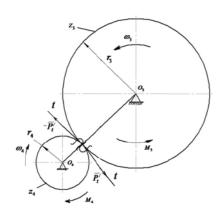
Determination of rigidity of the reducer cogwheels gearing III in the scheme of the drive drum of the mill regarding fig. 1
